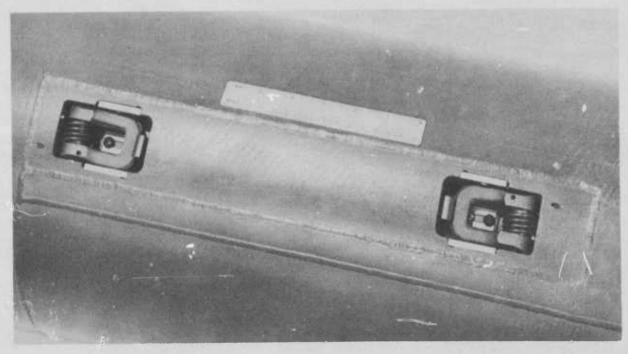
Fuel Tank Assembly Showing Suspension Lugs in Retracted Position.
